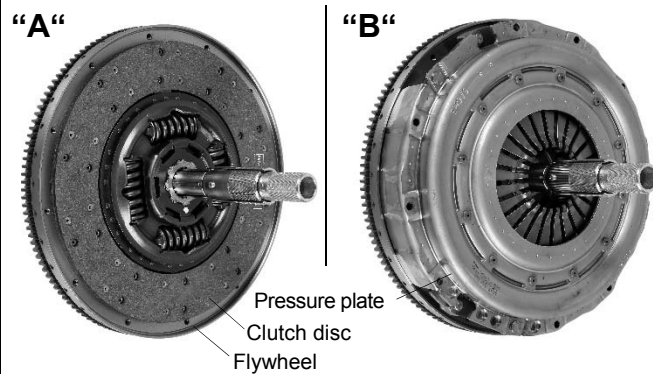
Centring the clutch disc/Mounting the pressure plate
